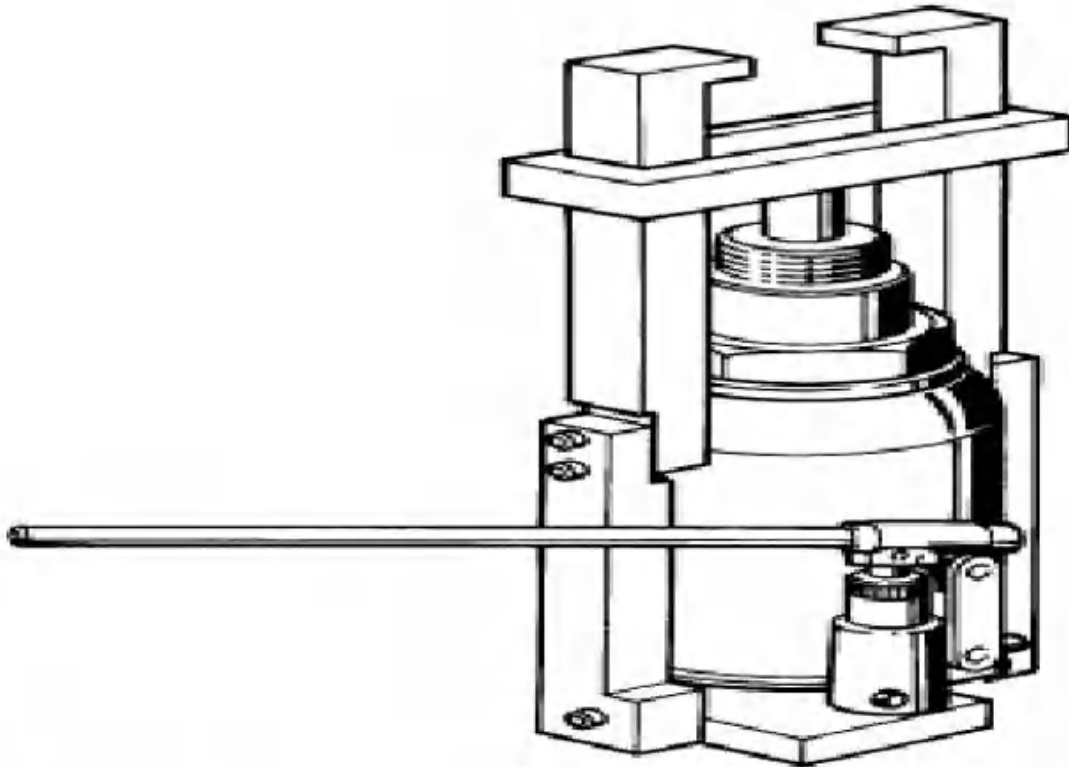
Identifying Special Tools 23 0 070 For Mounting Bracket
